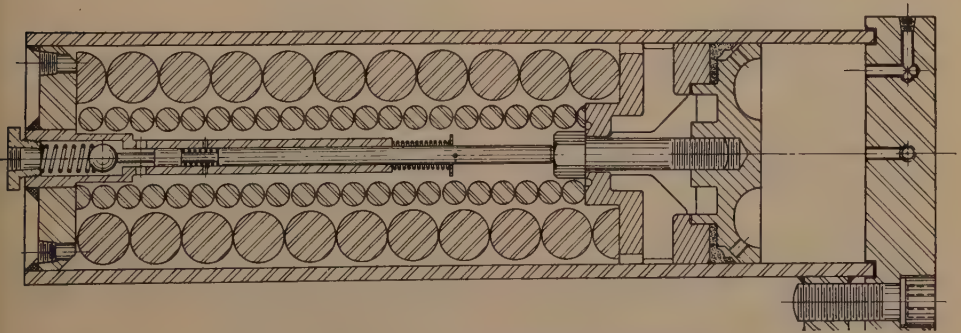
ACCUMULATOR WITH SPRINGS COMPRESSED.
